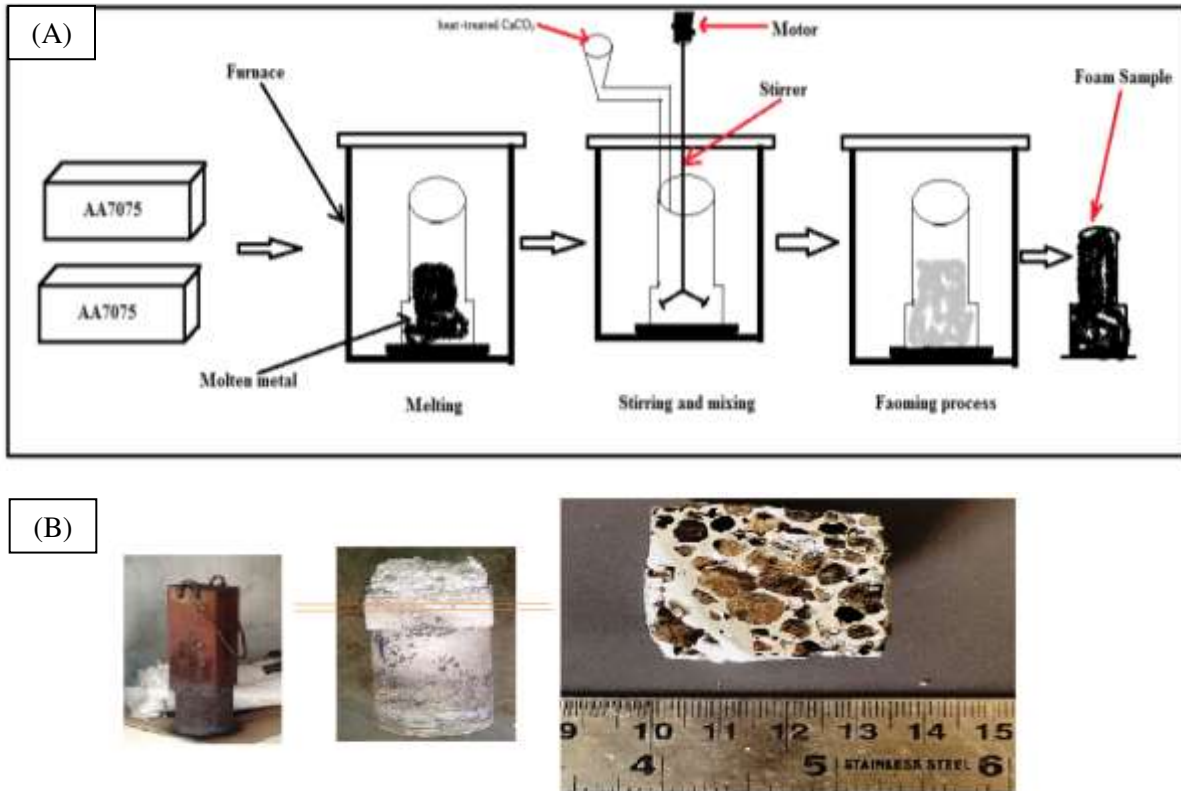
Procedure for Fabrication of Aluminium Foam (A) by stir casting method (B) Mould and produced foam
